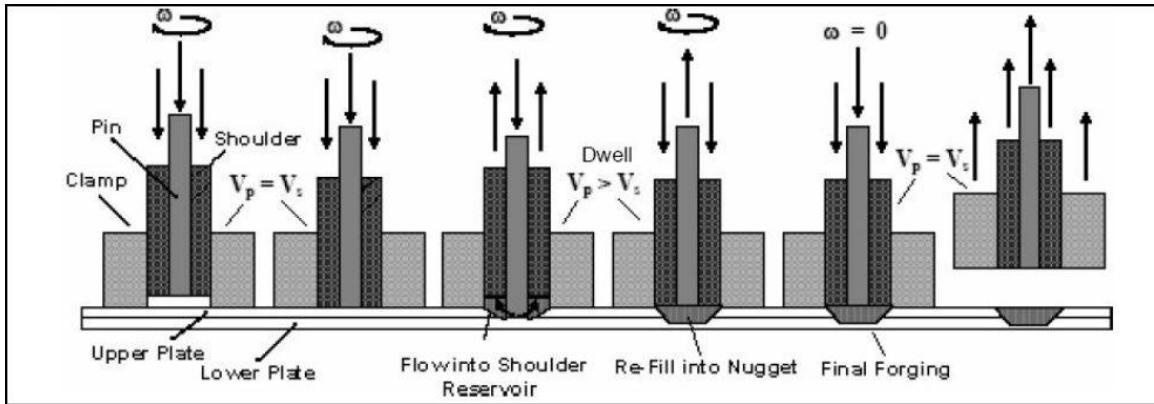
Schematic of refill friction spot welding [31].
